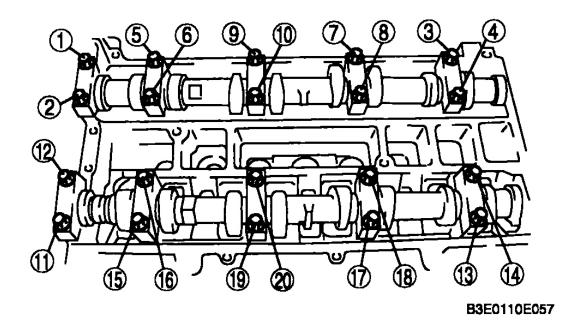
Identifying Loosening Sequence Of Camshaft Cap Bolts Courtesy of MAZDA MOTORS CORP.
